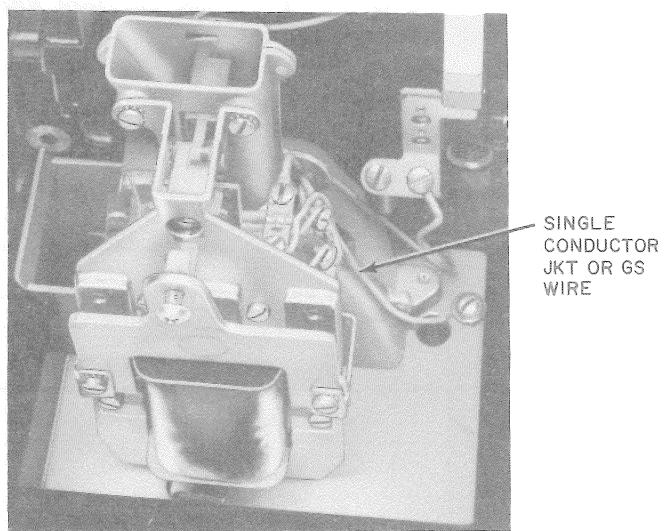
Method of Grounding Coin Collector Housing Assembly, Open Type Installation
